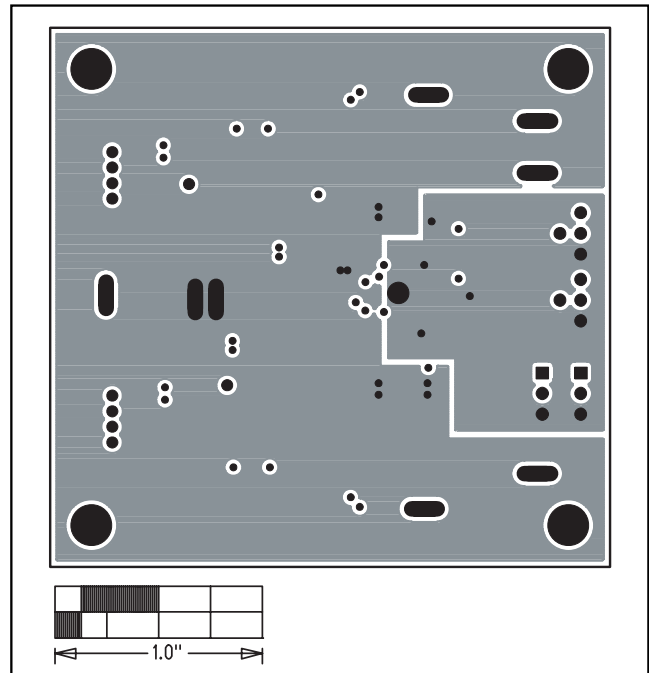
MAX8716 EV Kit PC Board Layout—Internal Layer 3, PGND/GND Layer
